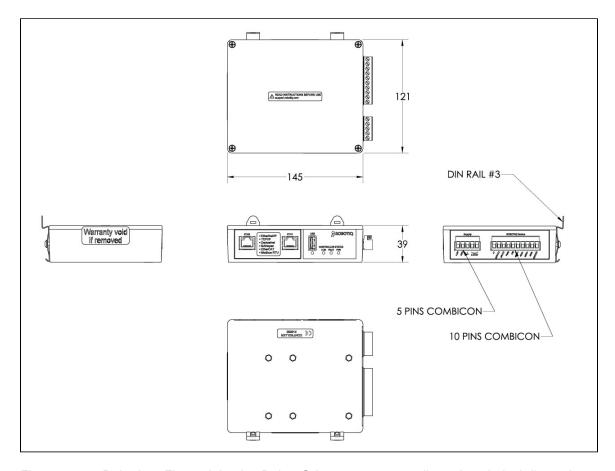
Robotiq 2-Finger Adaptive Robot Gripper – 200 controller unit technical dimensions.
